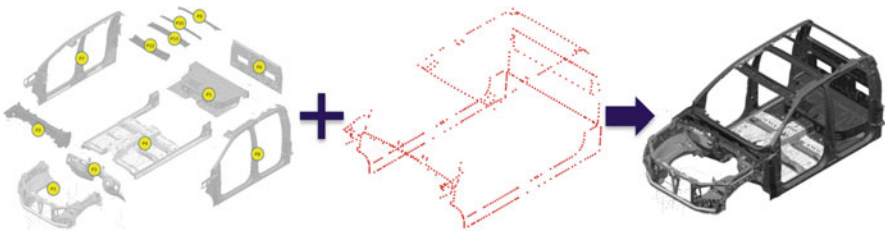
This bodyshell is the product of 12 assemblies joined together via 850 welds
